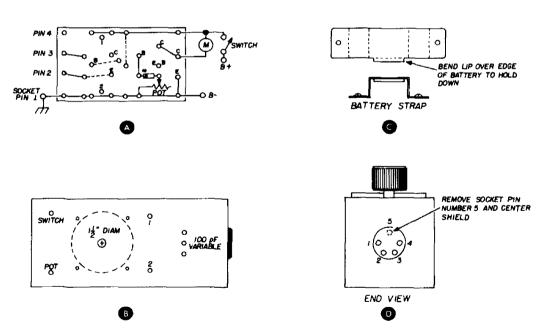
Full-scale layout drawings. (A) and (B) are templates for the circuit board and enclosure top. Holes E, B, C are for transistor leads. Component marked with asterisk is the 4.7k resistor in fig. 1, which was added after unit was built. Holes 1 and 2 are for mounting polystyrene pillars. Lower edge of knob (D) must be sawed off so set screw will reach capacitor shaft. Note that the numbers molded on the socket are not used. Three small holes in (B) are used to hold the dial in place.
